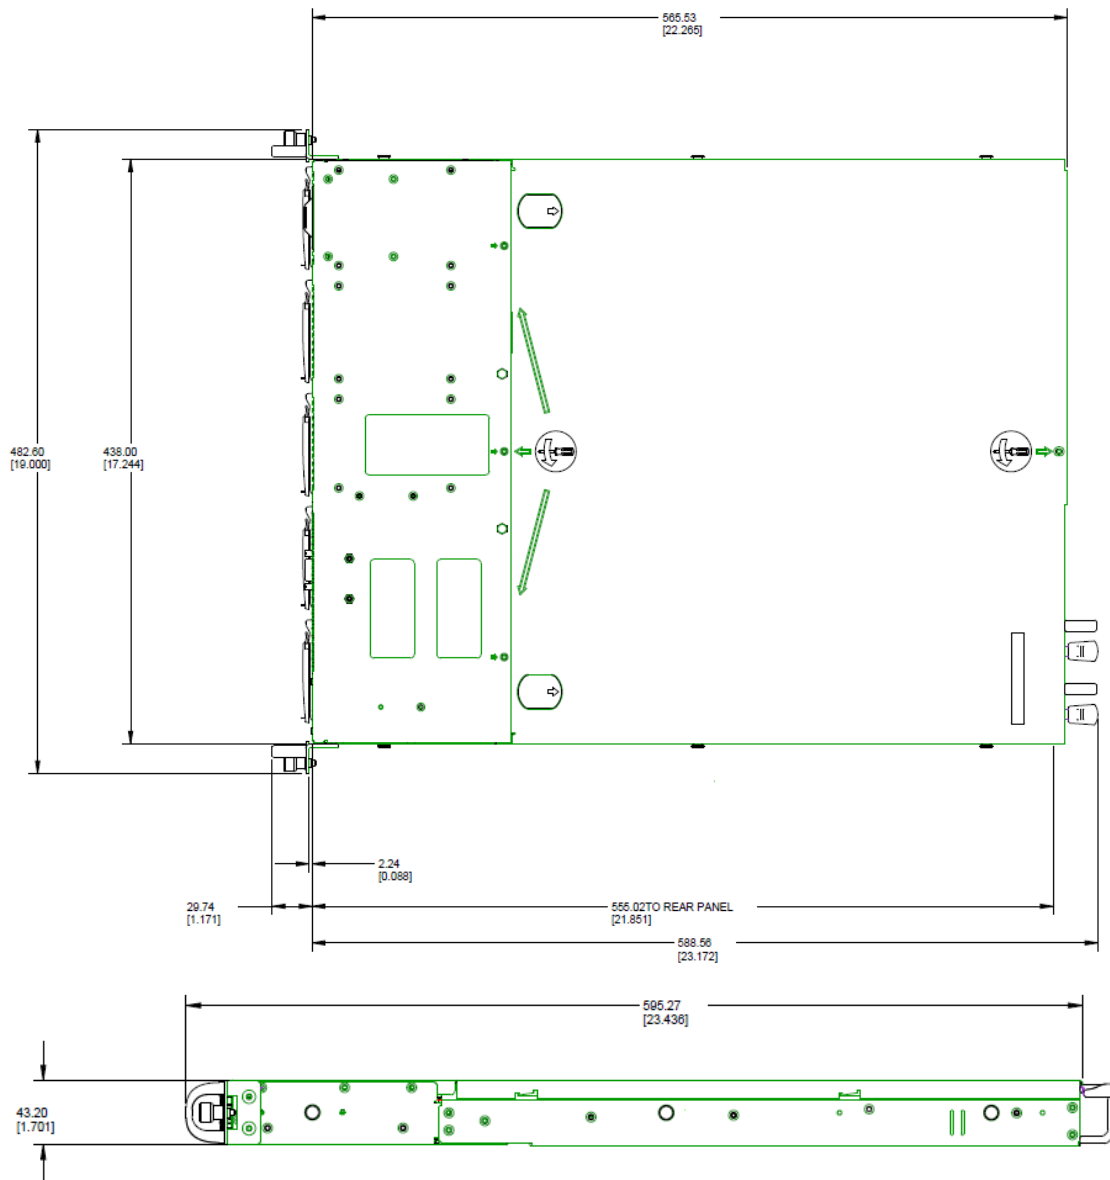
Chassis Dimension (With Hot Swap Power Supply)
